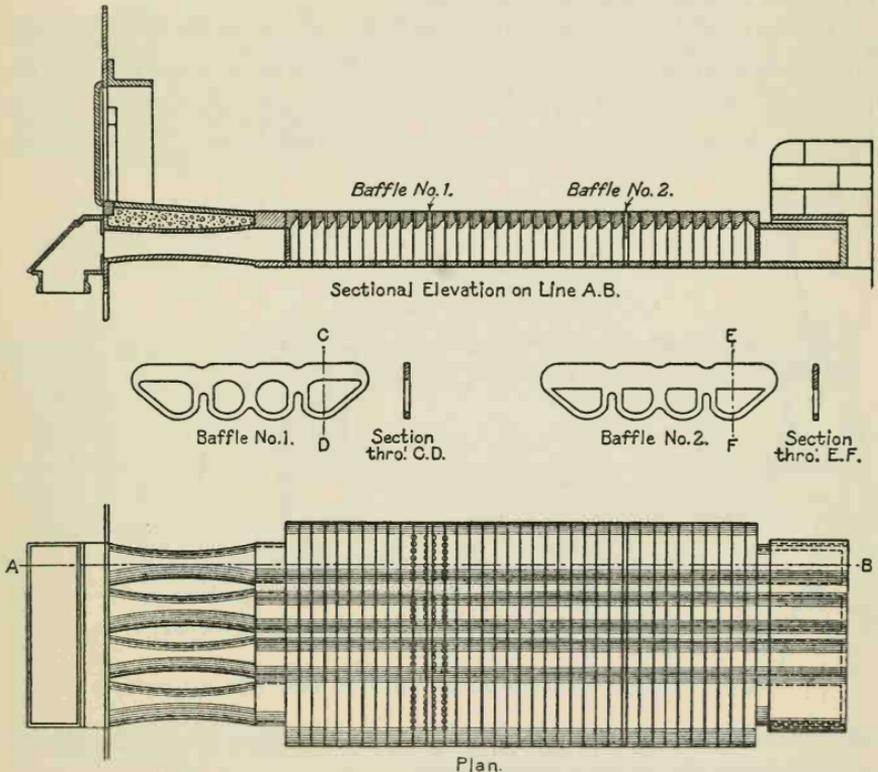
THE WILTON FURNACE. GENERAL ARRANGEMENT AND DETAIL OF BAFFLES.
